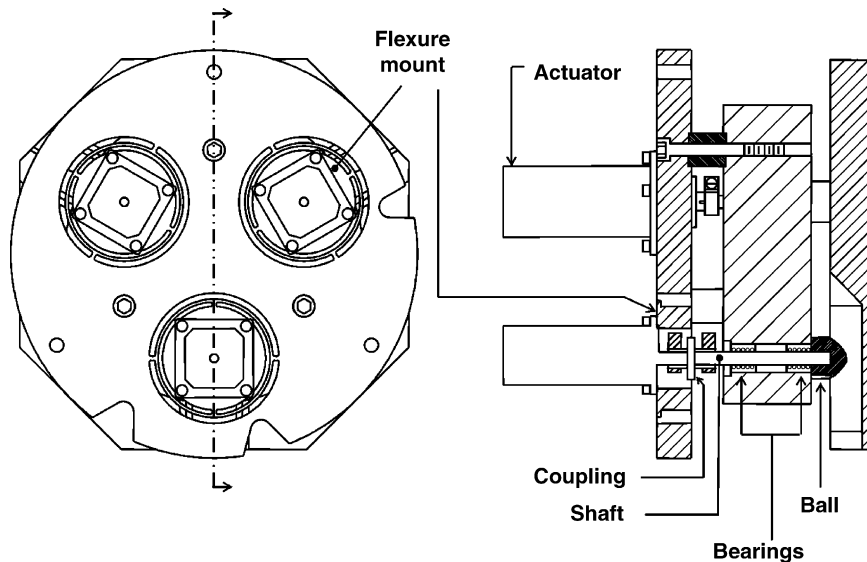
Detailed cross section of the actuated eccentric ball–shaft fixture.
